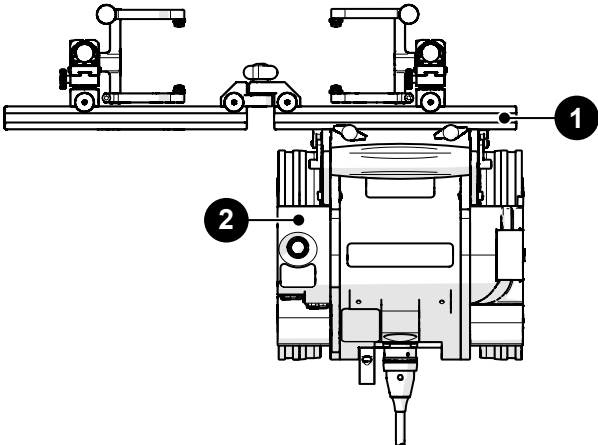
Pivoting probe holder frame configured for flange scanning
